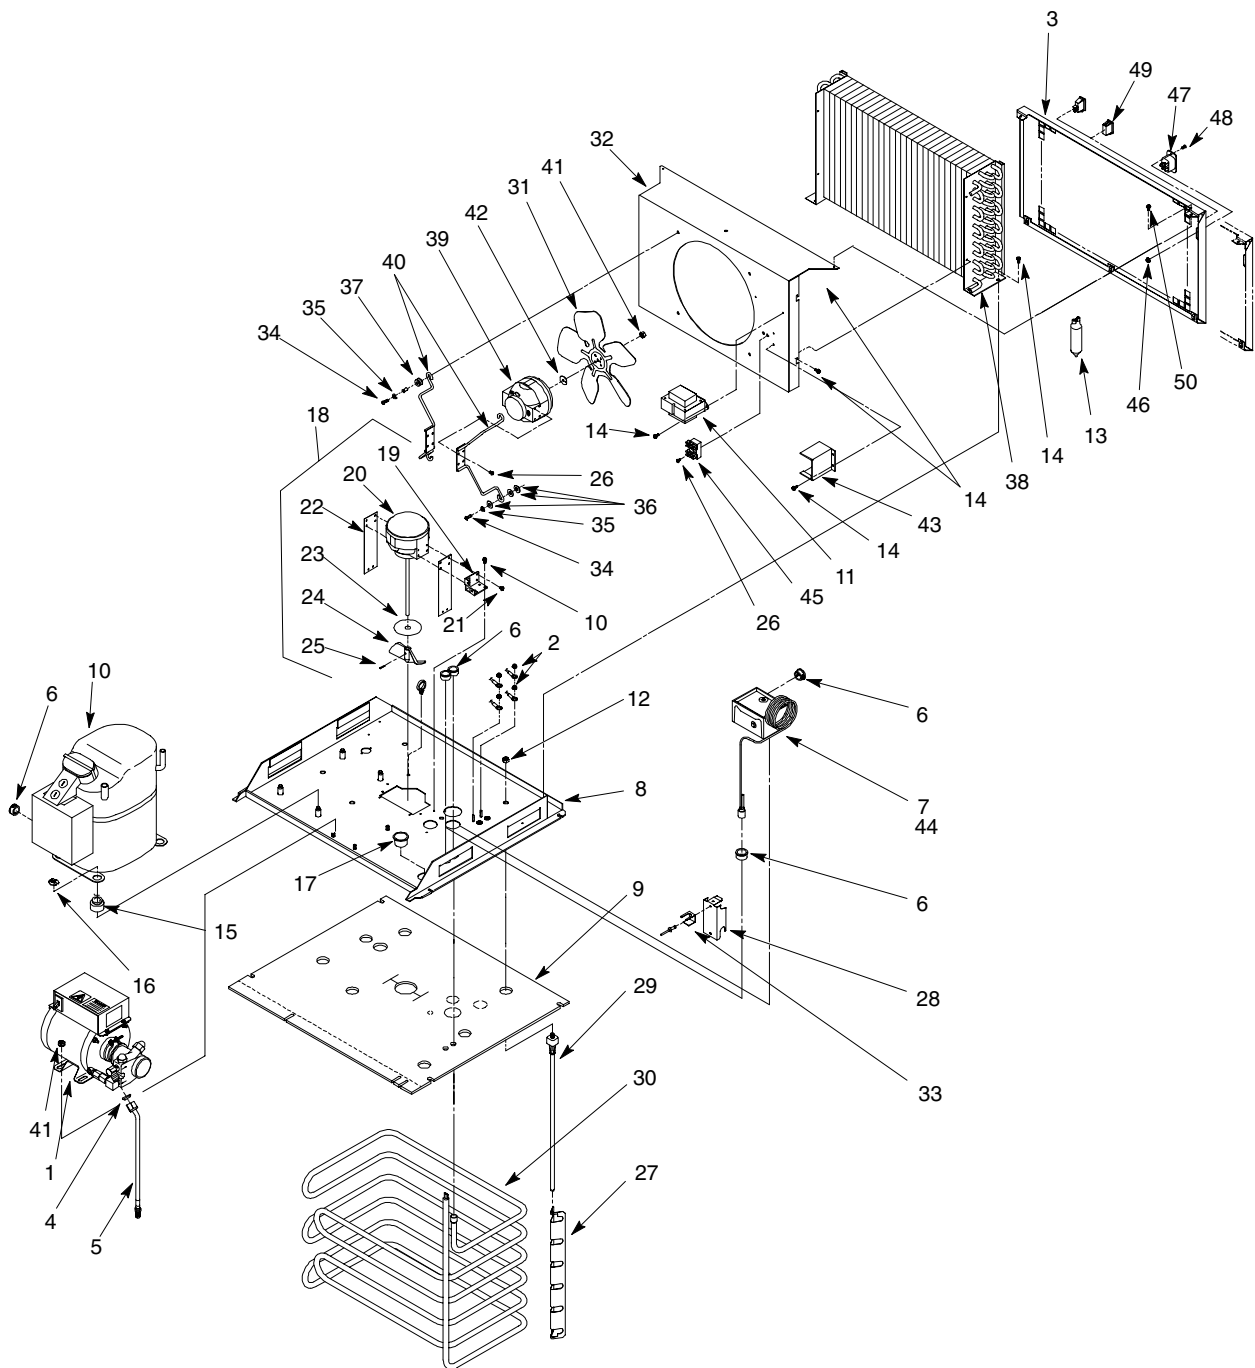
VANGUARD 245 REFRIGERATION (COLD CARB) ASSEMBLY
